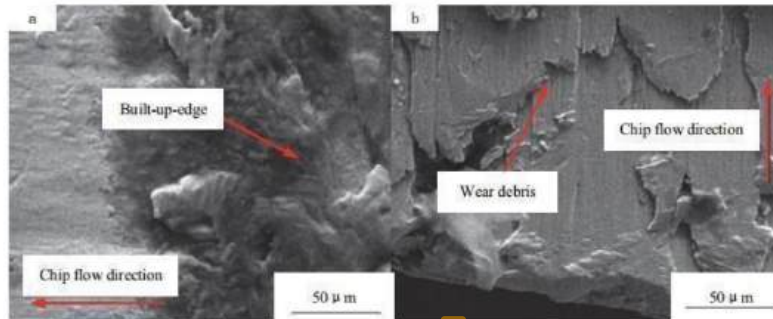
SEM image showing the adhesive wear in tool at 20 m/min of cutting speed (a) built-up edge (b) wear-debris [42]
